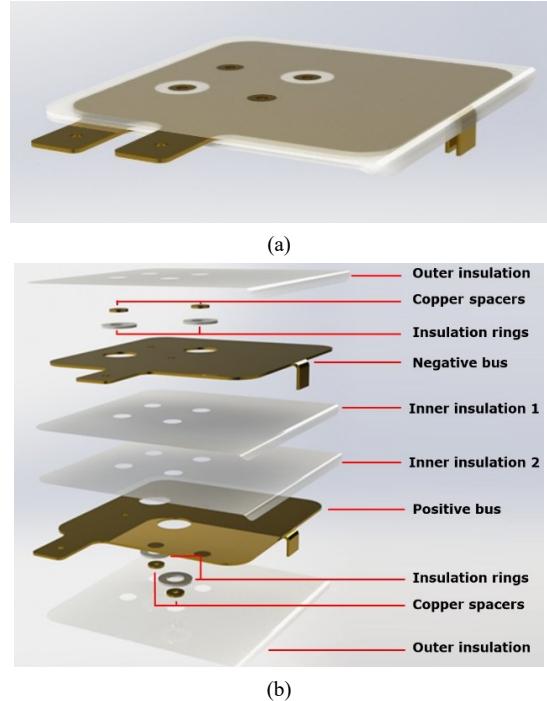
(a) The overall custom copper bussing. (b) exploded view showing the components of the bussing
